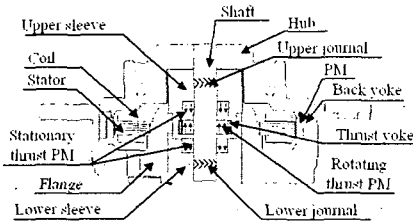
Structure of 3.5" HDD spindle motor using MTB and fluid dynamic journal bearing
